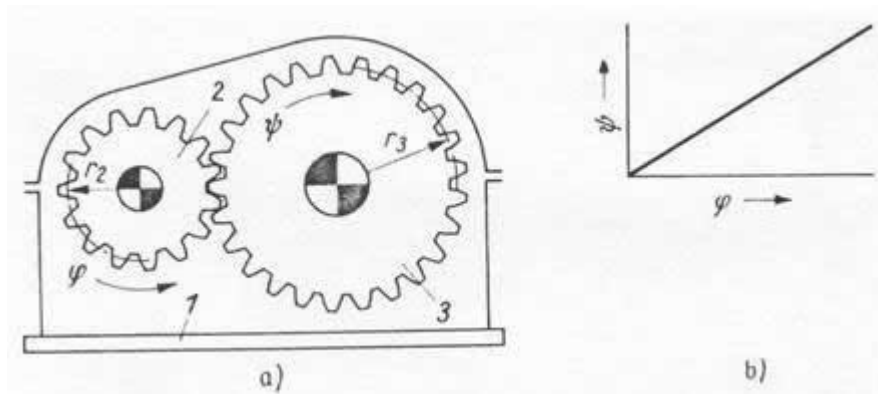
Gear unit (three-links): a) Spur gear; 1 fixed box, 2 and 3 gear wheels b) Zero-order transfer function (ÜF0)
